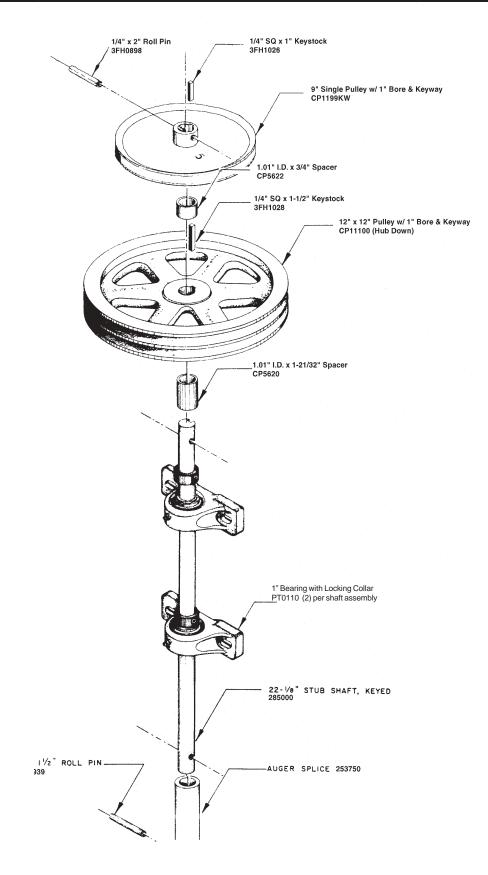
Stub Auger Assembly No. 5 (280005)
